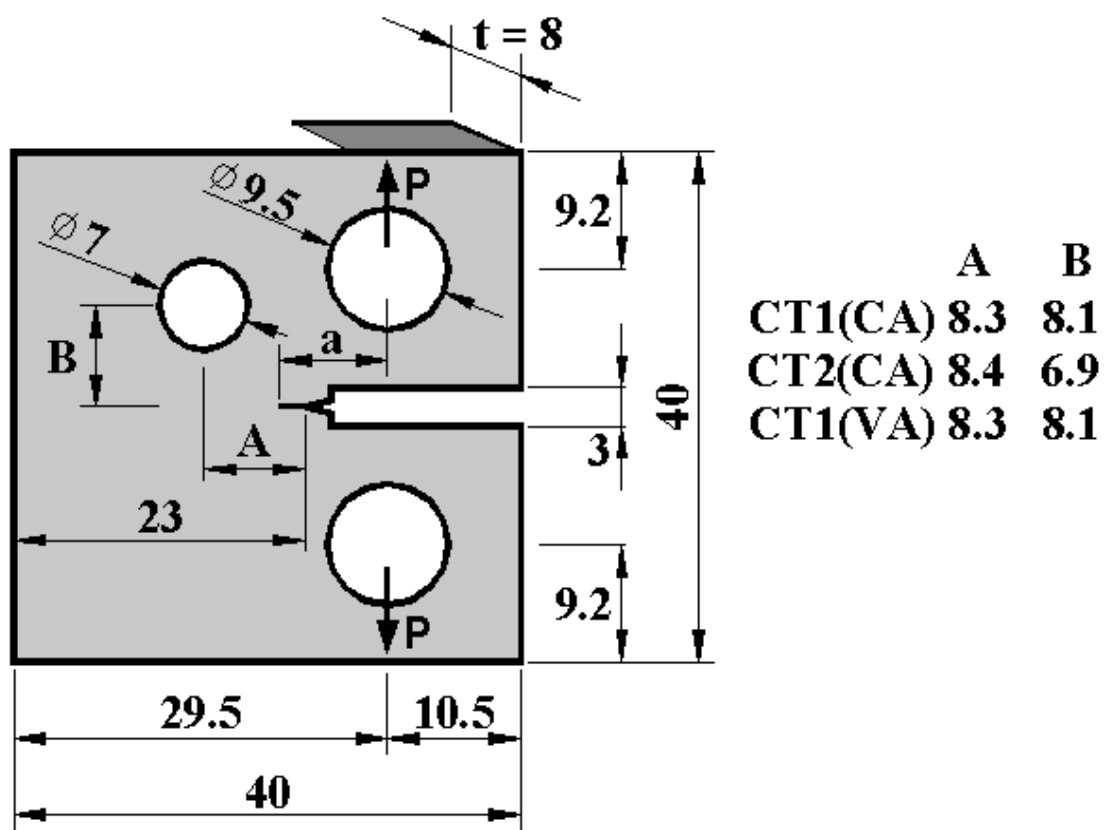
Measured dimensions of the hole-modified C(T) specimens (mm).
